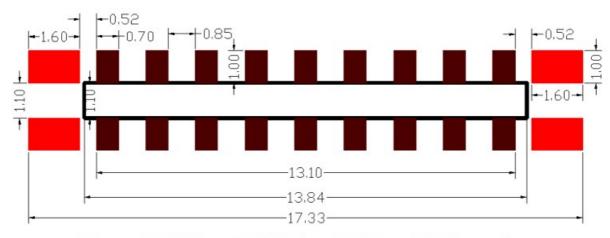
Plug-in PCB Land Pattern (Unit: mm)
